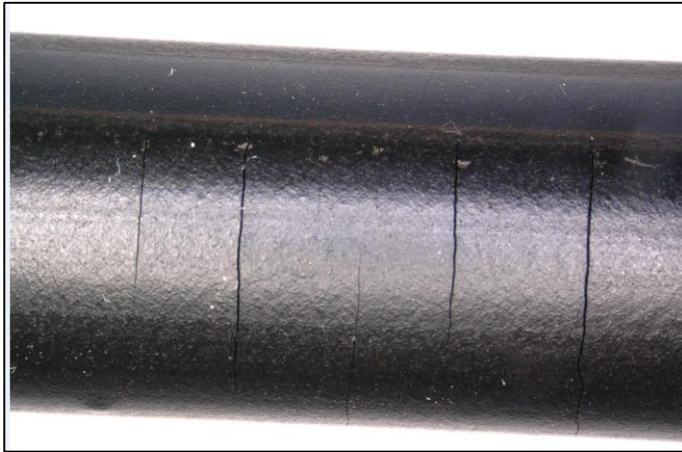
Cracks during bending at the O-ring with the supposedly lower thermal load
